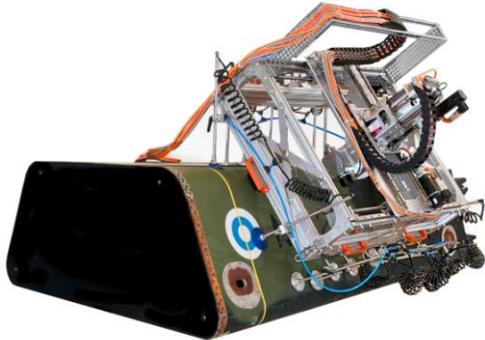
Prototype mobile milling machine (photo © WIWeB, Primacon)
